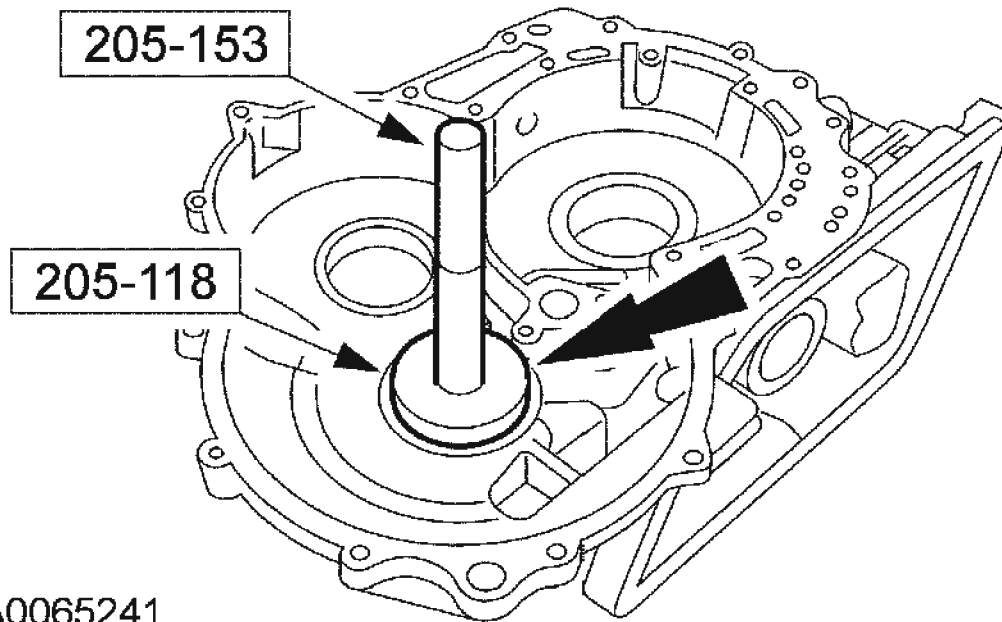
Installing Left-Hand Side Differential Case Bearing Cup Using Special Tool
